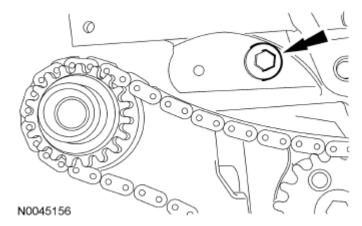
Locating Oil Pump Chain, Sprocket And Bolt Courtesy of FORD MOTOR CO.
